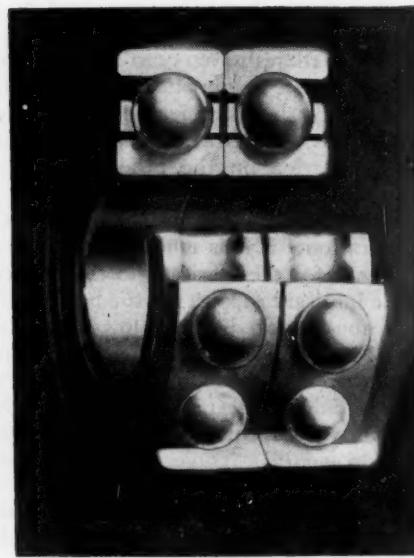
DOUBLE-ANGULAR-CONTACT BALL-BEARING ASSEMBLY
